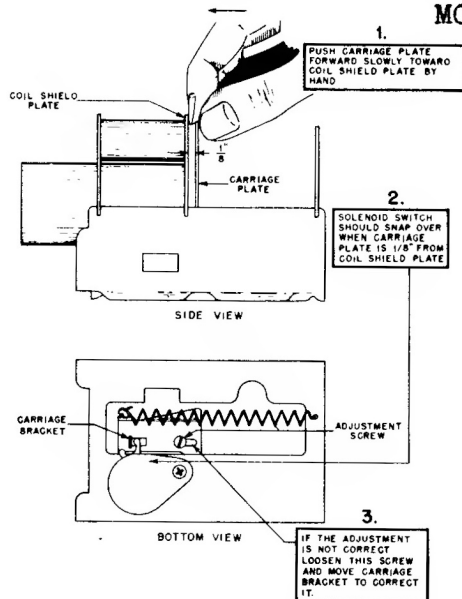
SOLENOID SWITCH ADJUSTMENT
